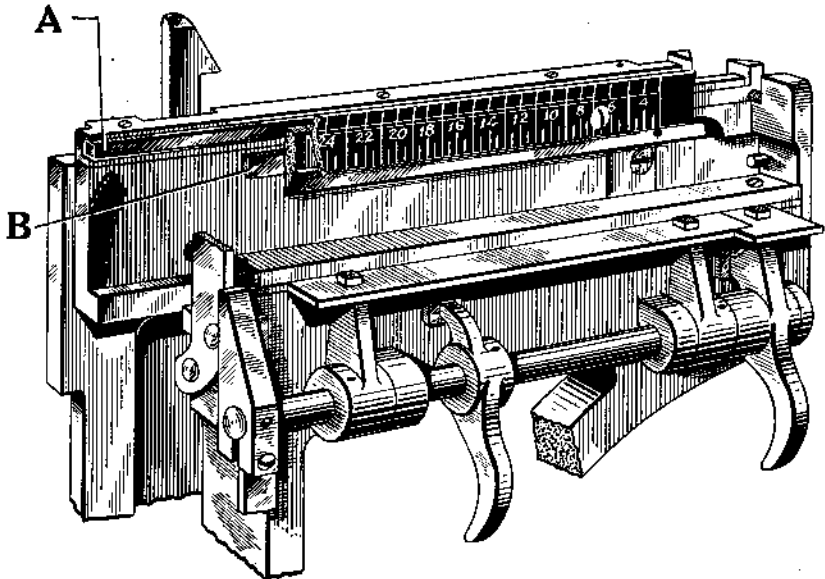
Assembling Elevator Showing Spring Rails A and B.
